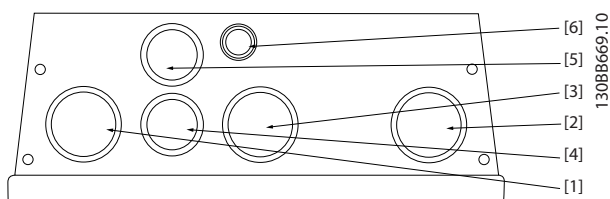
B1 - IP55 Threaded Gland Holes
